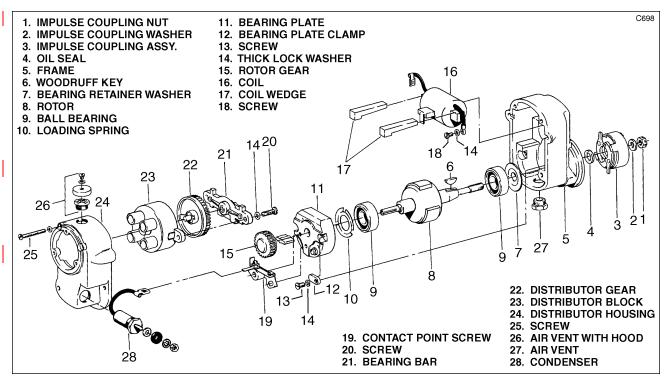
Exploded View of 4200/4300 Series Magneto
